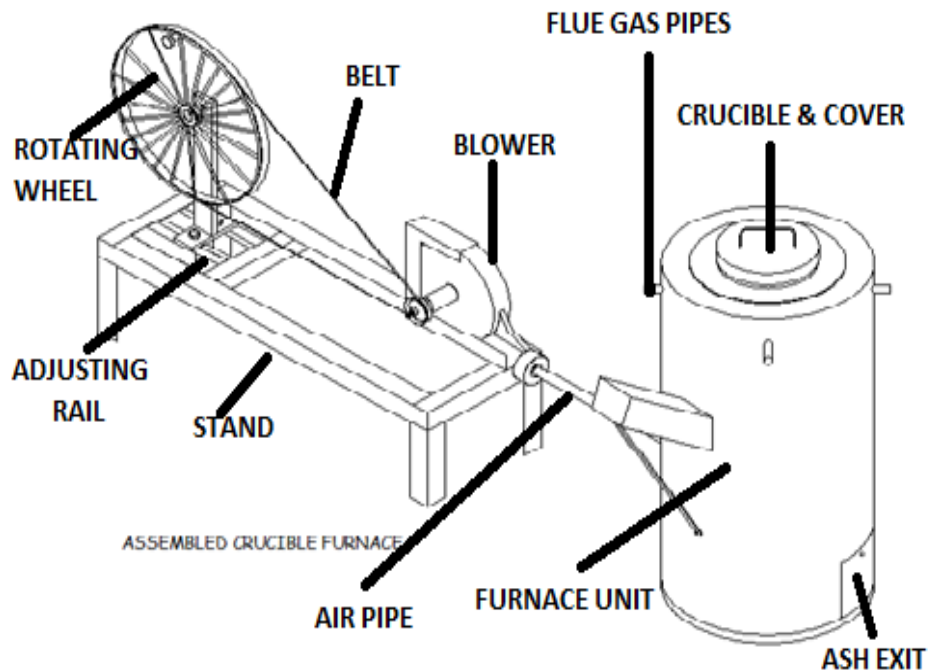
ASSEMBLED CRUCIBLE FURNACE
